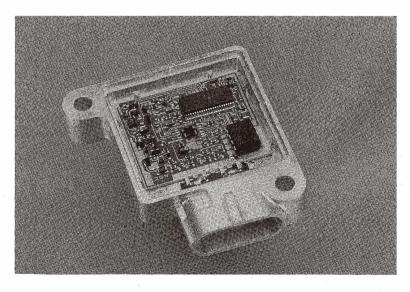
Chip-scale packaging of micromachined motion sensors on a ceramic circuit board.
